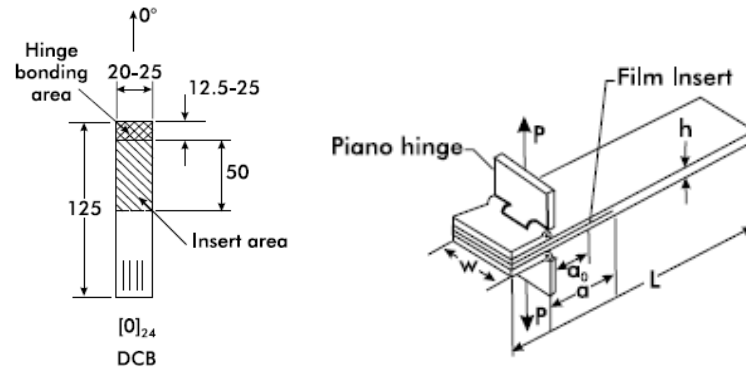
Typical dimensions, layup, and geometry for the DCB specimens.³²
